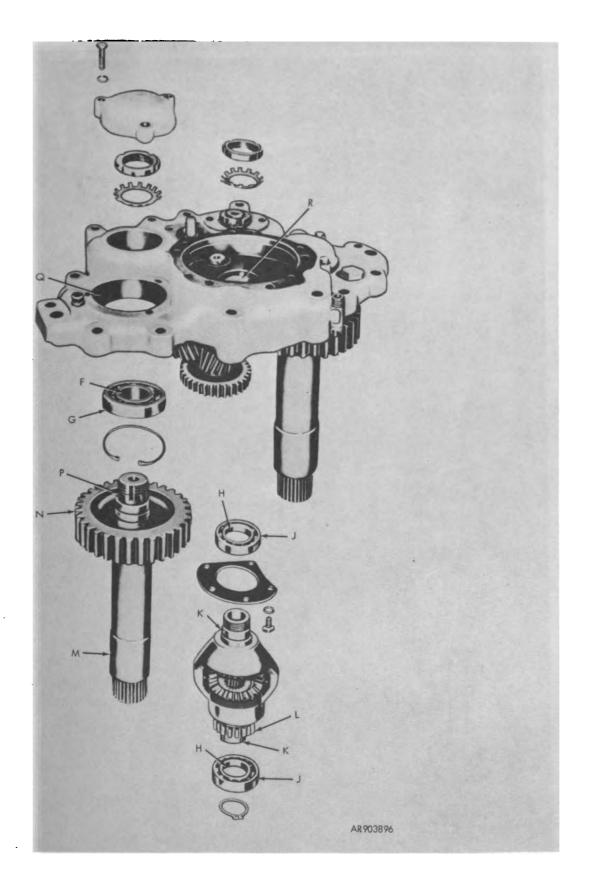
Traversing gearbox upper housing and gear train wear points (2 of 5).
